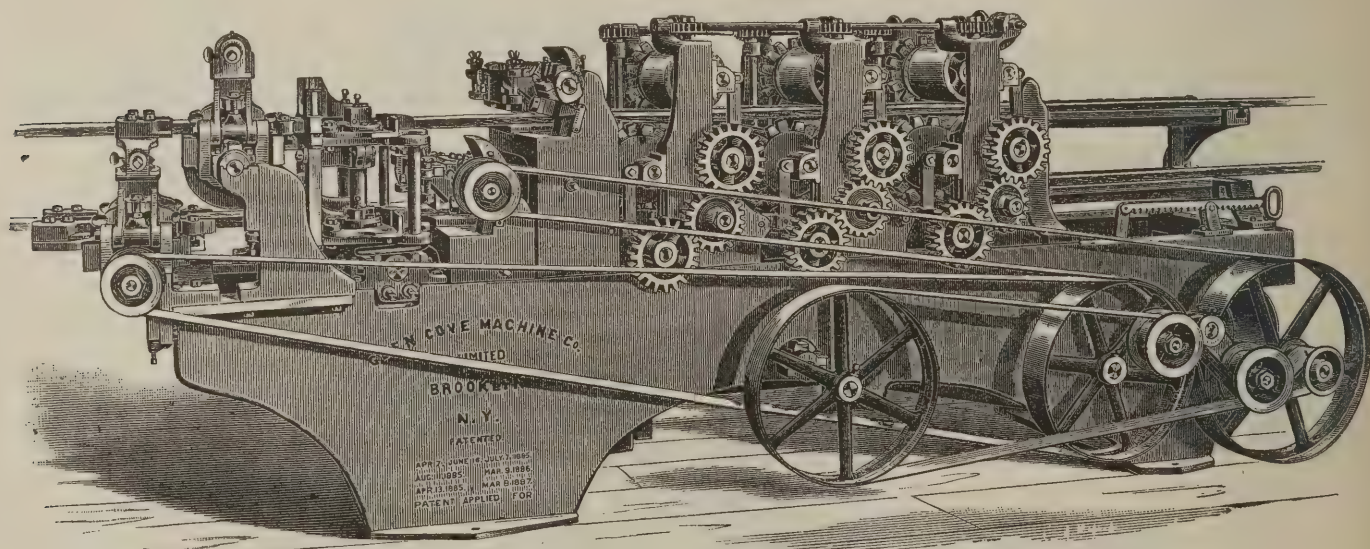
Double-Deck Flooring Machine.—Manufactured by the Glen Cove Machine Co., Brooklyn, N. Y.
